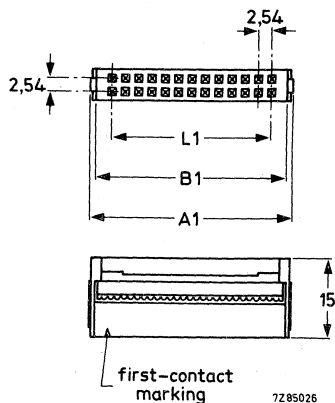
Cable connector without polarizing key, for dimensions A1, B1 and L1, see Table 1.
